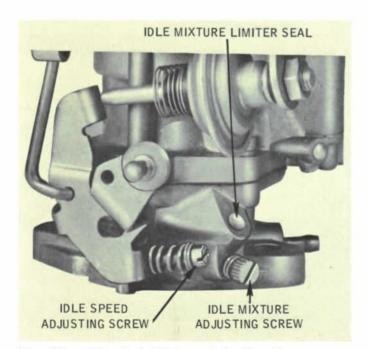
Idle Fuel Mixture Adjusting Screw - Carter 1 - V
